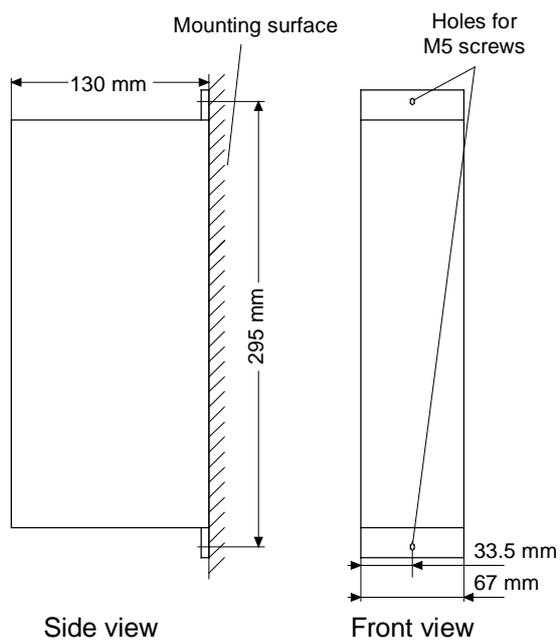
Dimension drawing of the 6 A EMC filter
